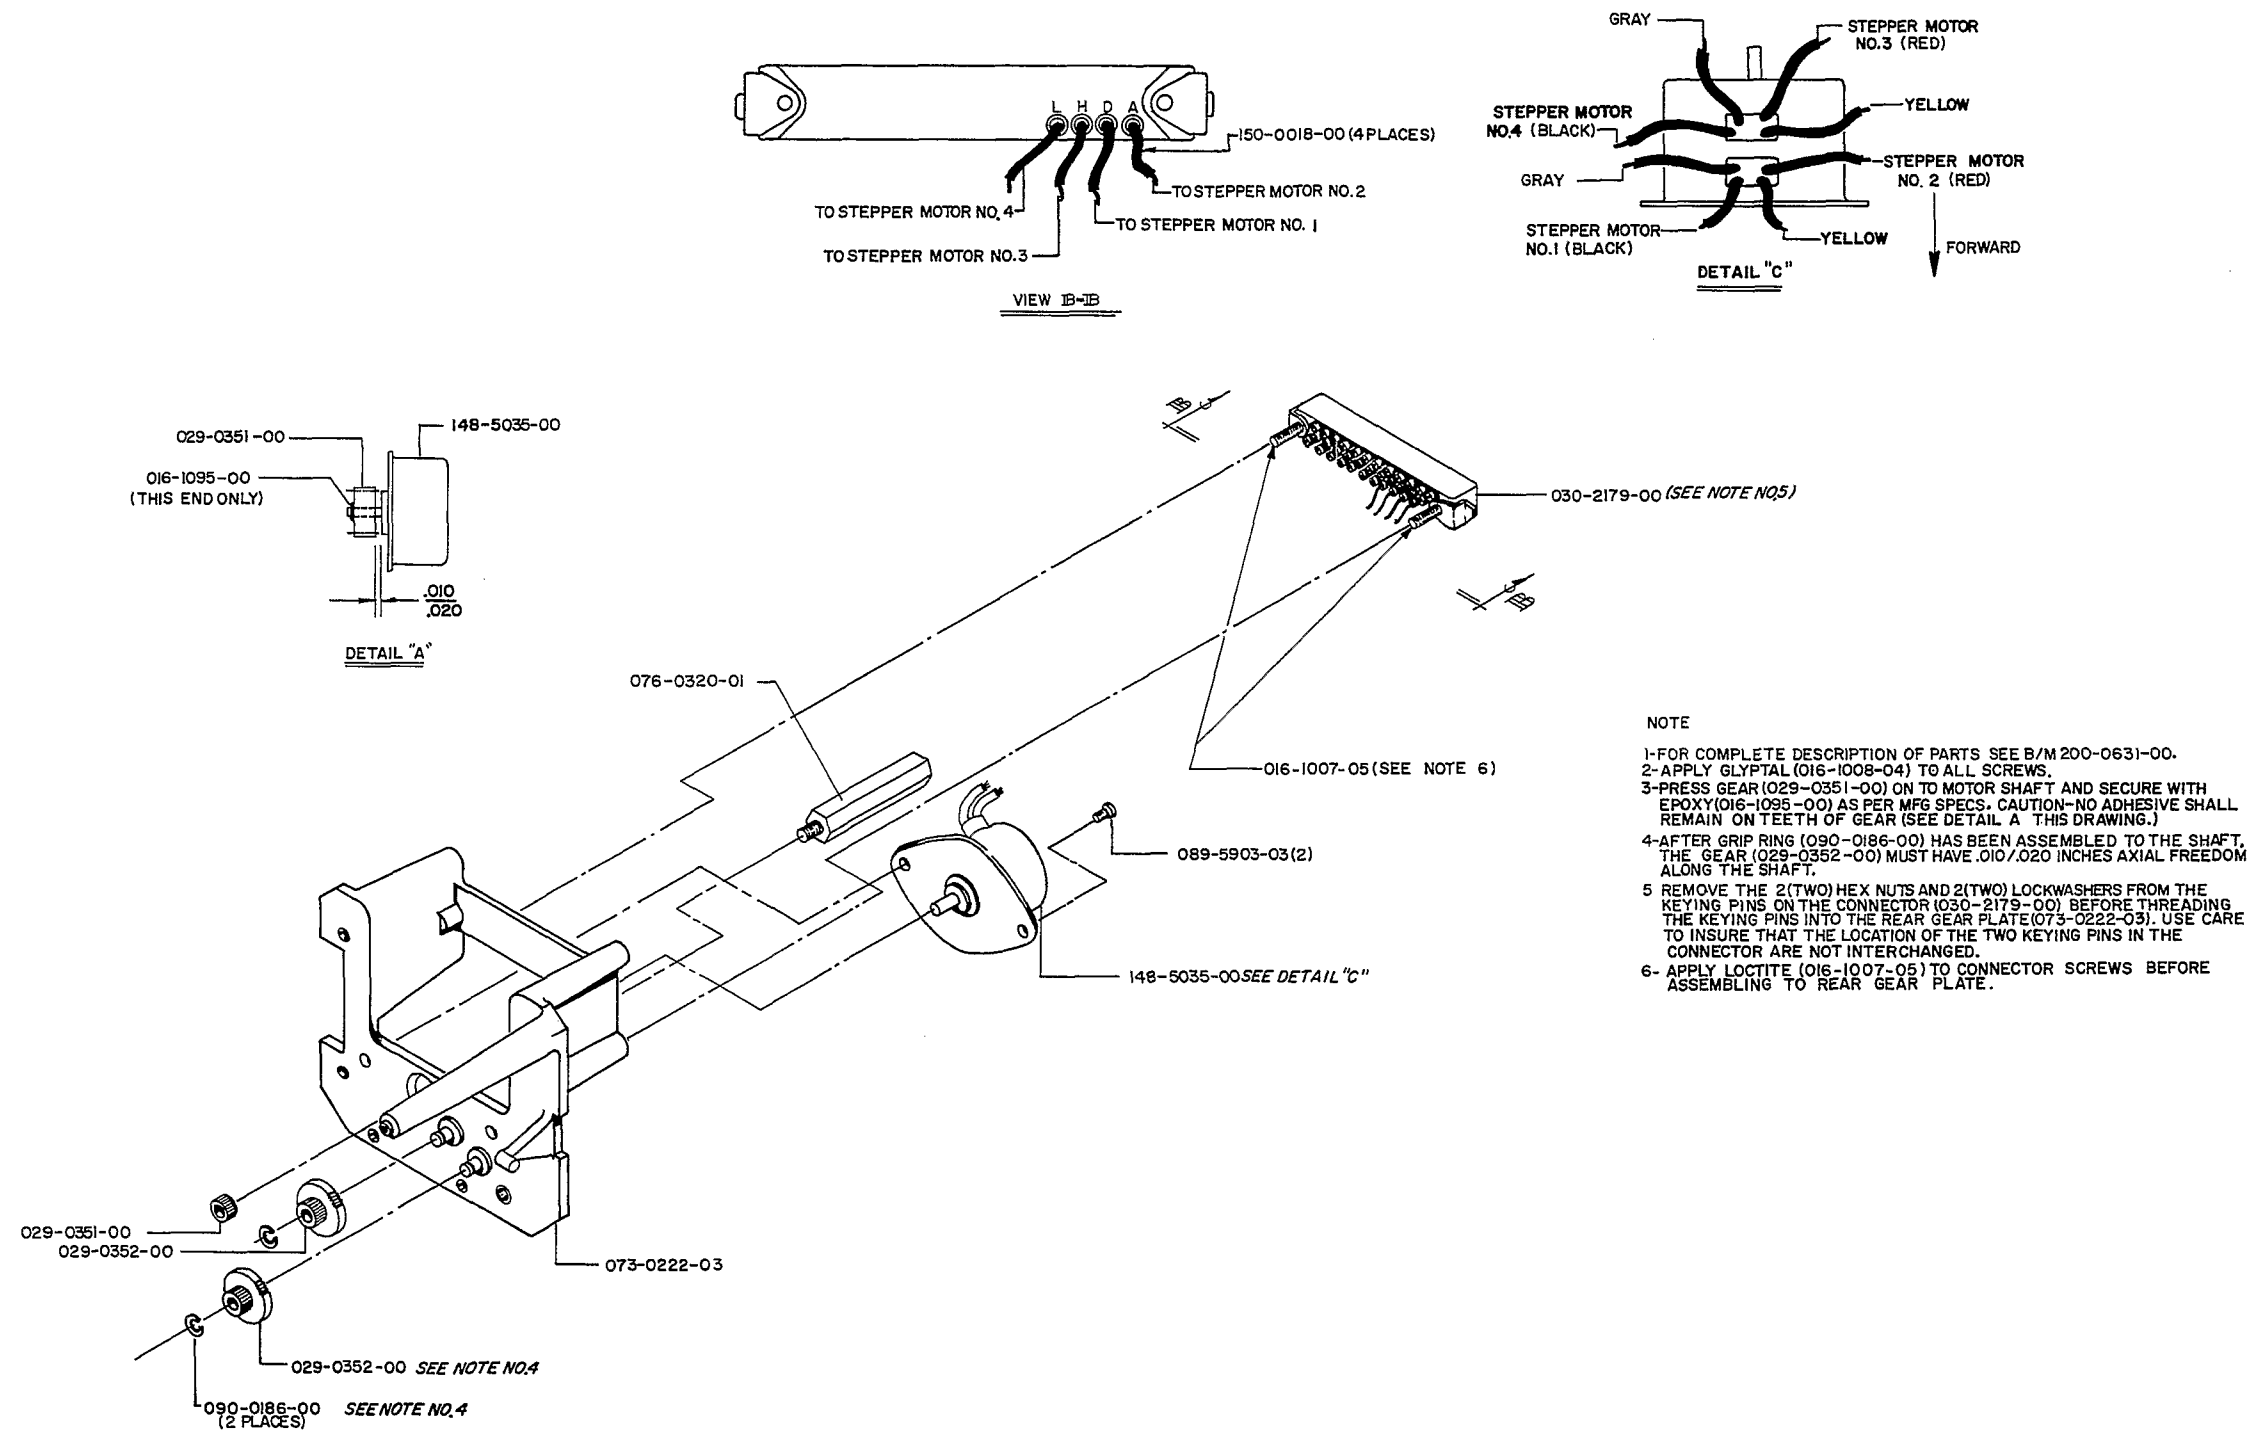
A KI 525A REAR PLATE ASSEMBLY
